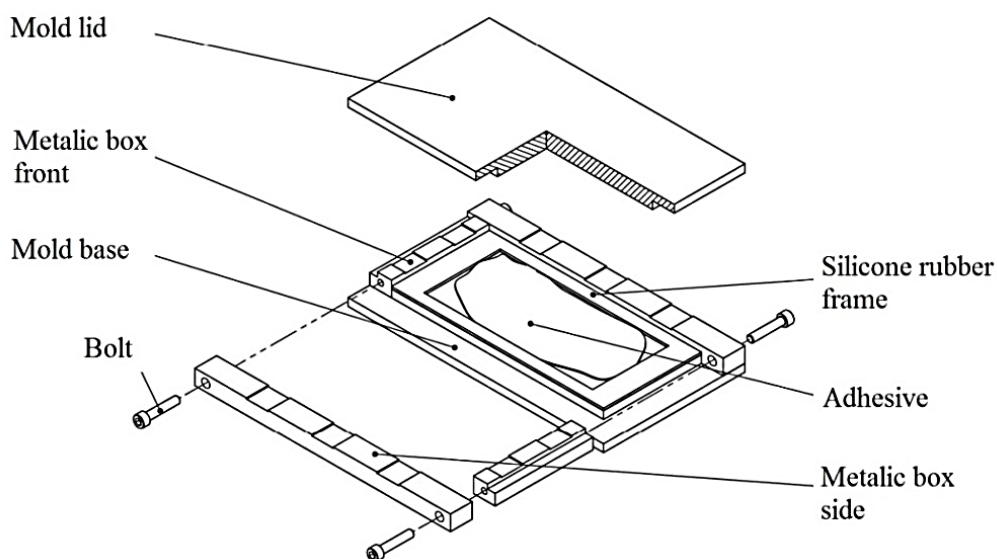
Scheme of the mold used to manufacture plate specimens [30].
